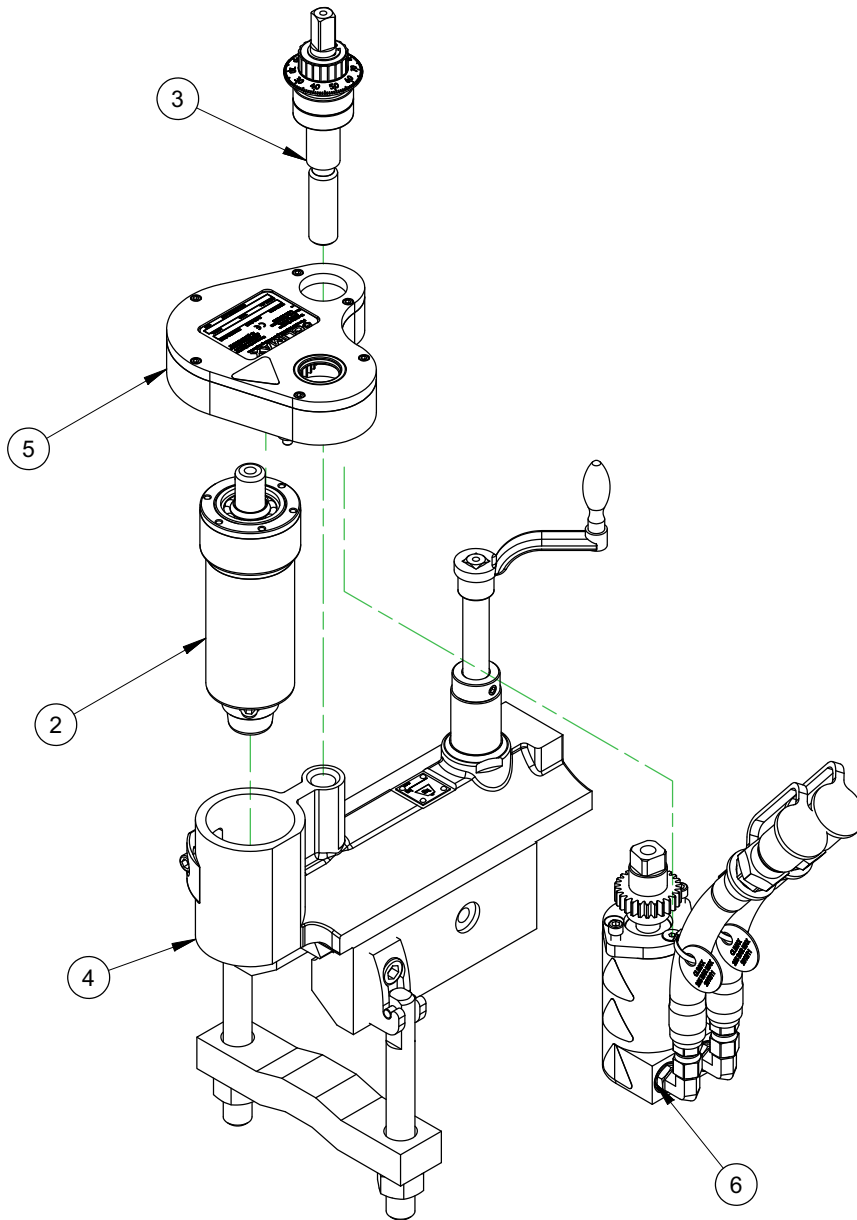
TOPSLIDE WELDON SHANK INCH 120V ELECTRIC ASSEMBLY (P/N 103899)
